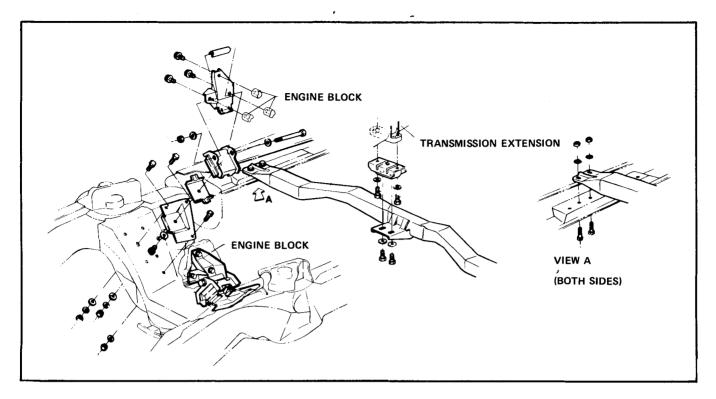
Engine Insulators - 6 Cyl. A Series
